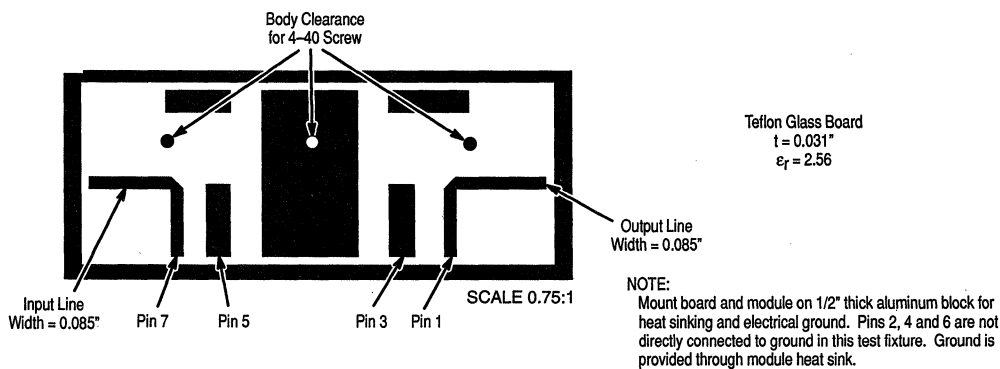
UHF Power Amplifier Test Fixture Printed Circuit Board
